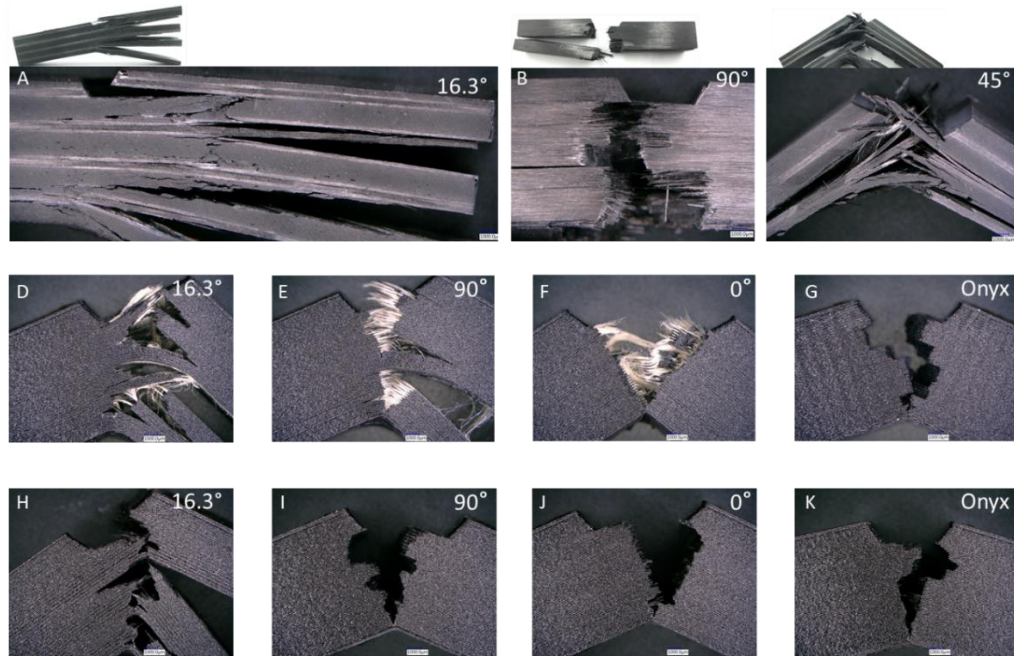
13. Charpy V-notch post impact fractured samples. (A-C) Carbon/ epoxy samples showing high degree of delamination for the helicoid, fiber fracture for 90° and fracture and delamination for 45°. (D-G) Additively manufactured Kevlar fiber reinforced samples showing fiber bridging in reinforced specimens. (H-K) Additively manufactured Carbon fiber reinforced samples revealing the varying fracture patterns based on fiber orientation. (Scalebars 1mm)
